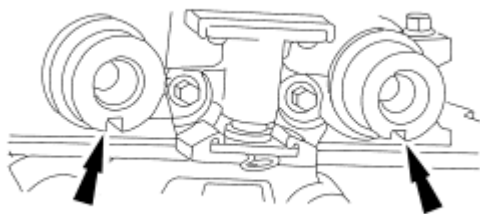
Identifying Keyways On Camshafts To 6 O'clock Position
